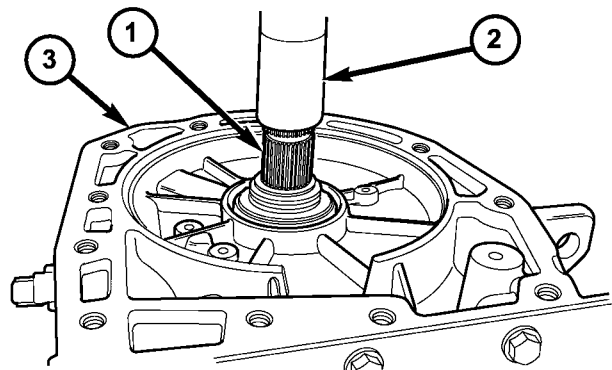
Use Arbor Press to Remove Output Shaft from Case
